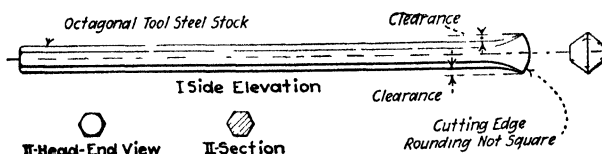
Homemade hand drill for masonry. This tool will work fairly well in concrete. In an emergency, one can be forged from steel reinforcing bar.
